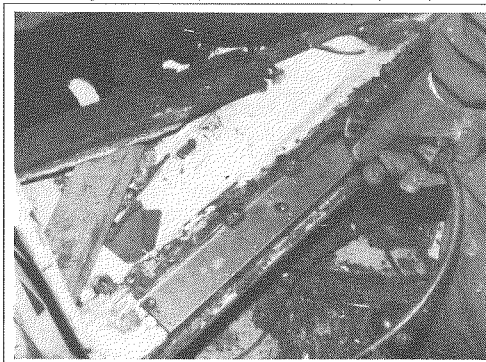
Trim the inner edge of the tread plate to match the floor edge and tack...
